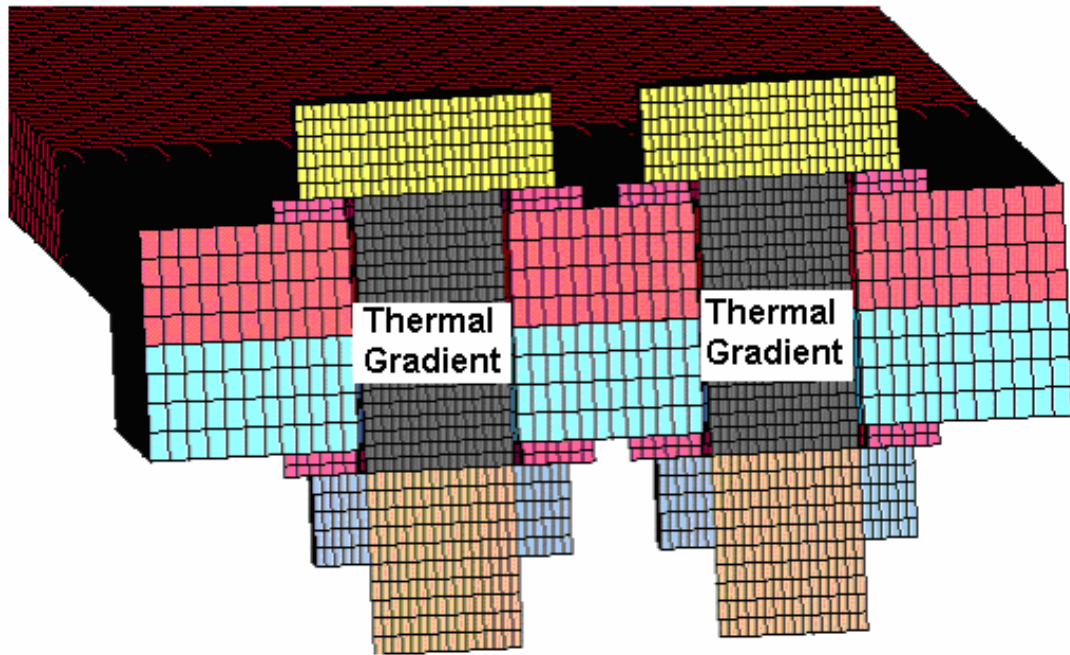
Bolt assembly with thermal gradient on the bolt shank
